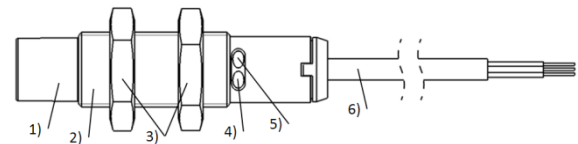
Cable version construction, 1) Sensing surface, 2) Mounting thread M12x1, 3) Fastening nuts, 4) Sensor state indicator (green LED), 5) Switching state indicator (yellow LED), 6) Connection cable
